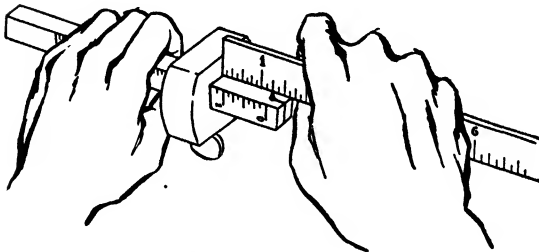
For accurate marking with the marking gage, always check the setting of the gage with a rule.
